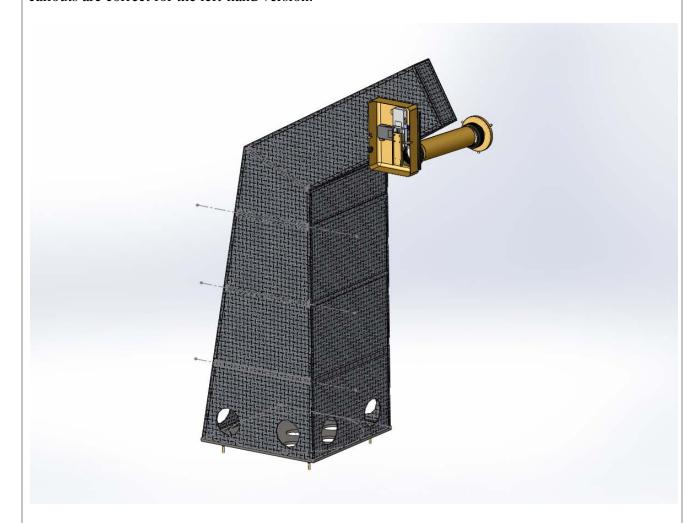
PR3 Receiver Pier Assembly. Right-hand giraffe shown with cover removed.
